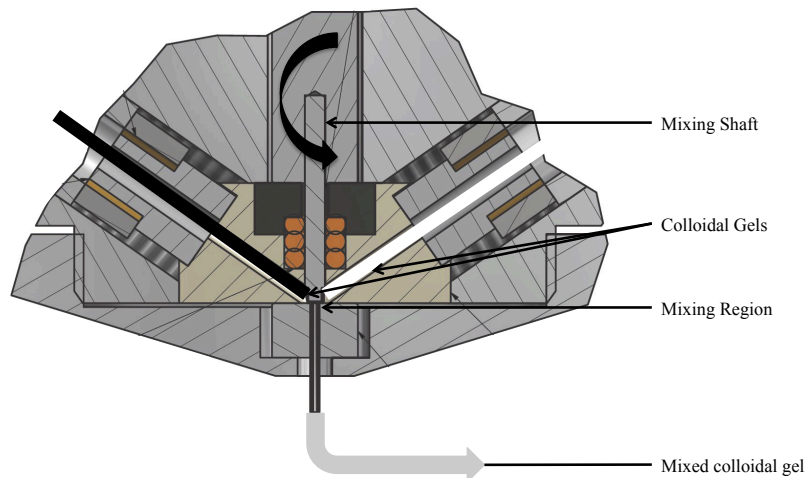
A magnified view of the mixing chamber assembly. Individual colloidal gels enter a common mixing chamber where they are mechanically mixed using a rotating paddle to produce a new mixed composite colloidal gel.
